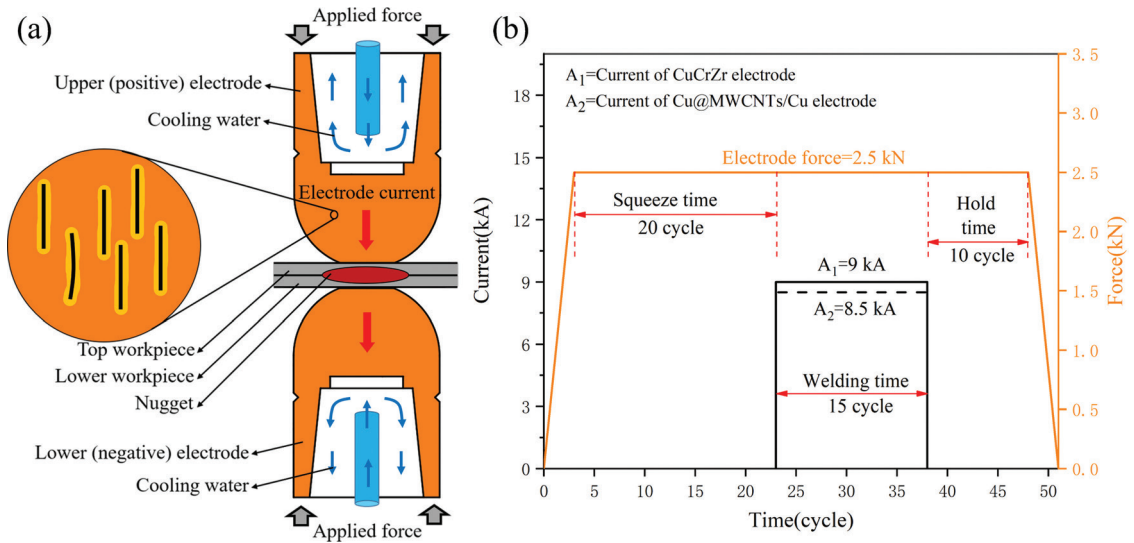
Test equipment and welding process: (a) RSW schematic diagram, (b) RSW process parameters.
